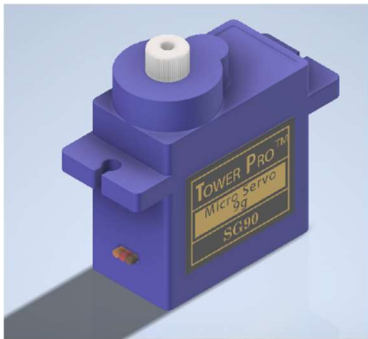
Orthographic view of SG90 servo motor used for bolt mechanism
